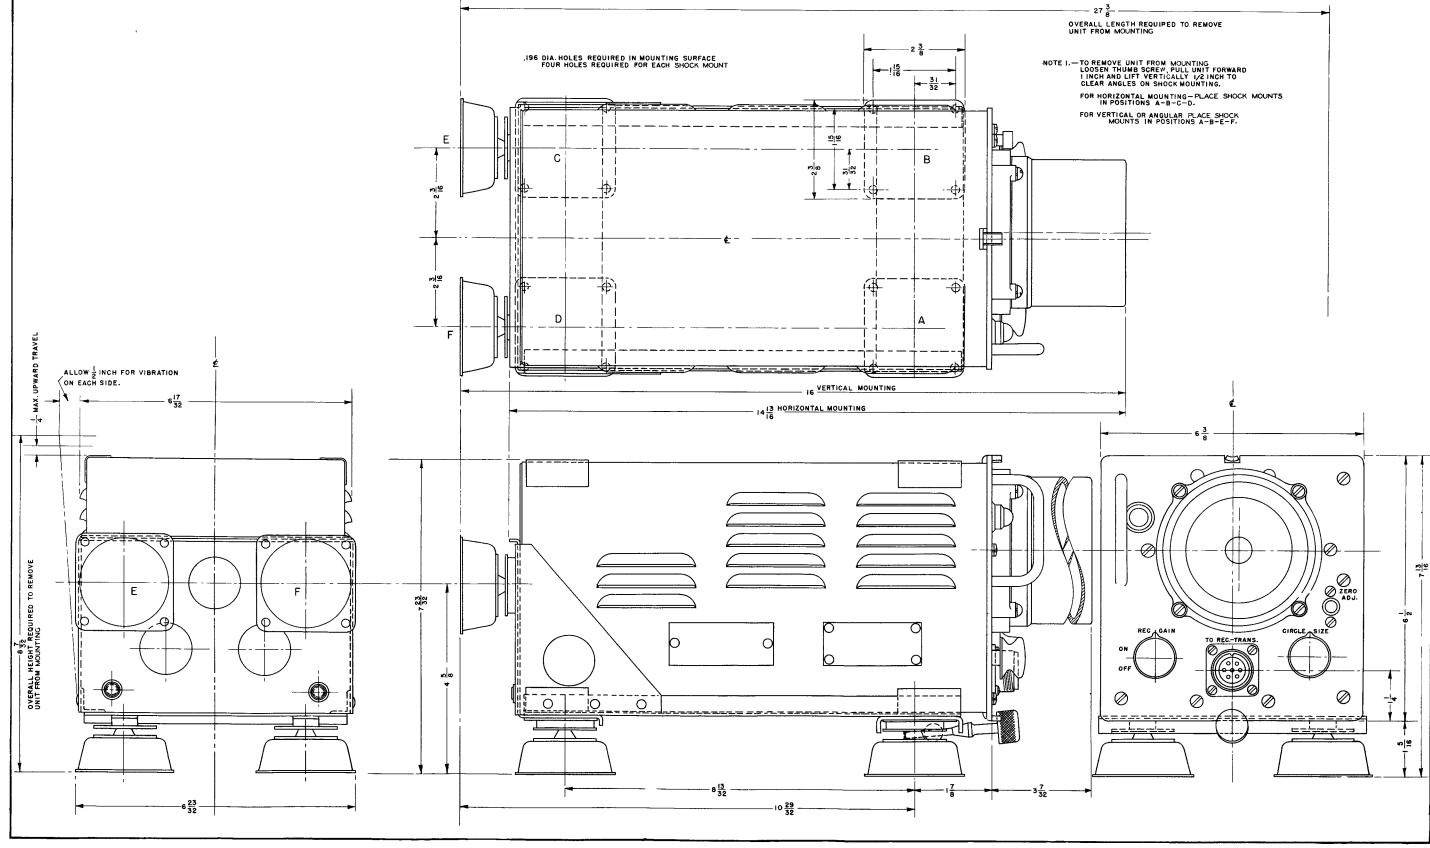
Indicator I-152-(*) — Outline Drawing
